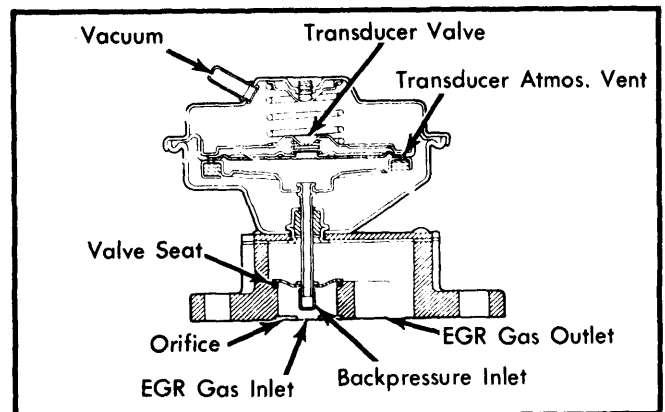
Integral Backpressure Transducer Type EGR Valve
